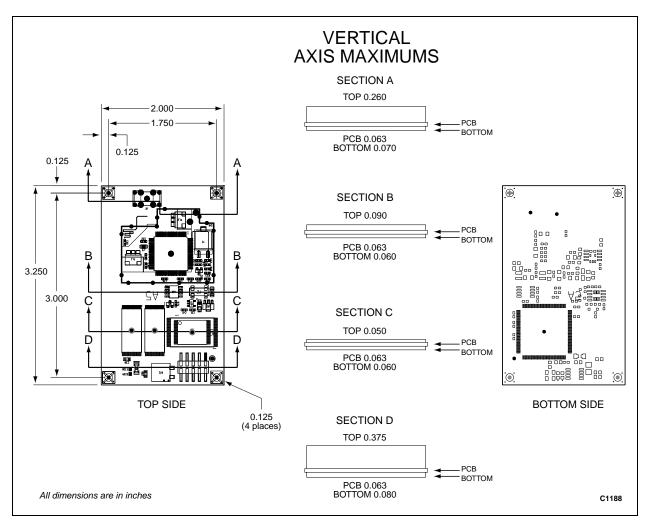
Mechanical Drawing of the Jupiter-T GPS Receiver Board
